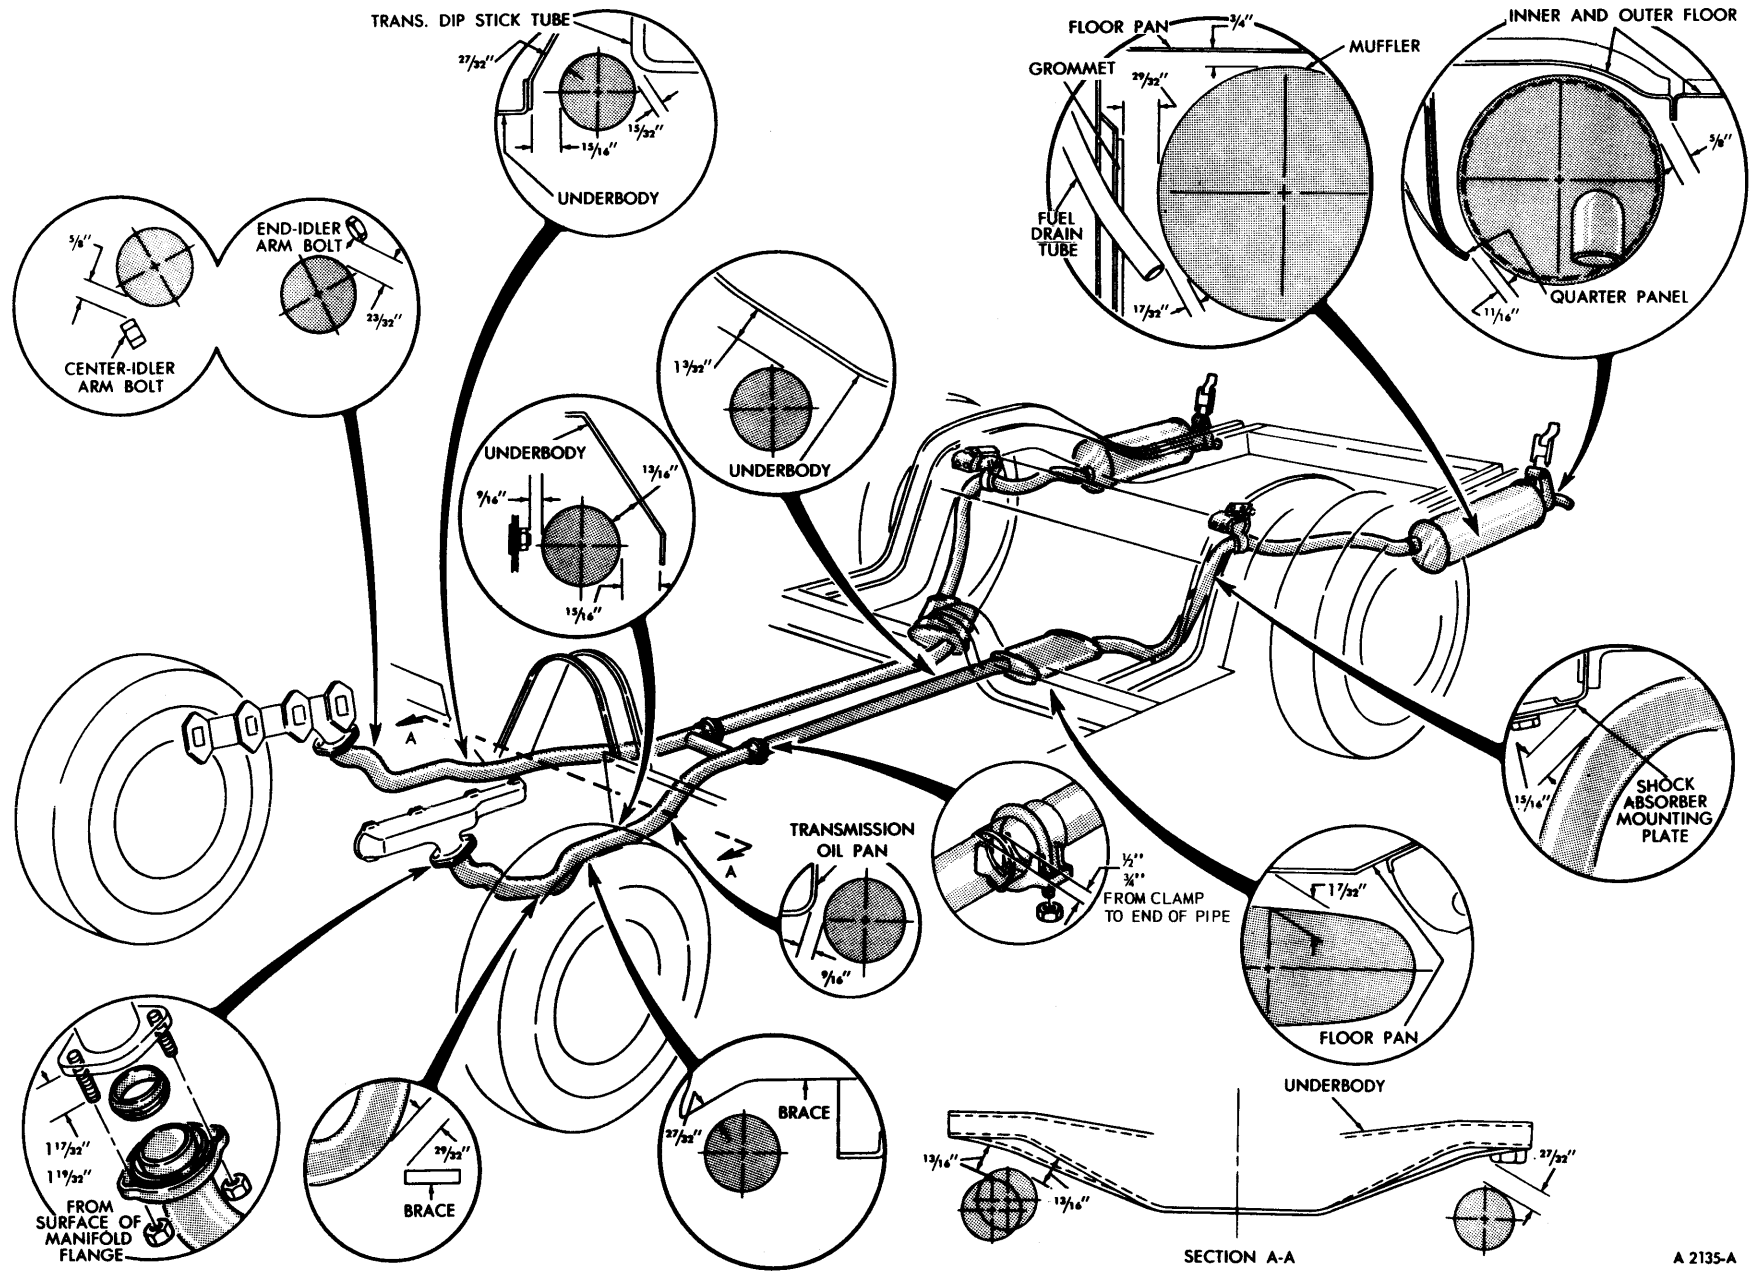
Thunderbird Exhaust System Clearance Dimensions
